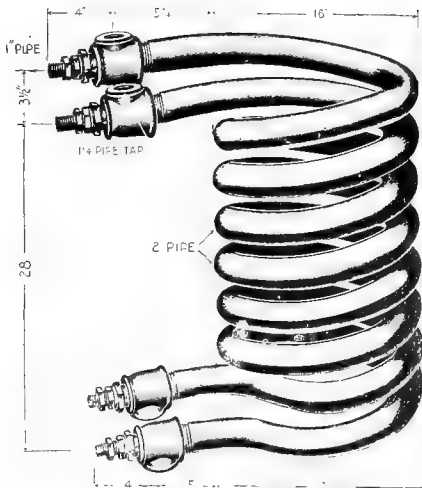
Gold's Double Duplex Coil (high); 2 in., No. 609.
